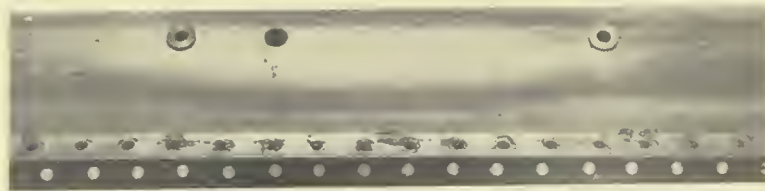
STRESS AND CORROSION CRACKS IN HIGH-TENSILE STAINLESS STEEL SPAR FLANGE
